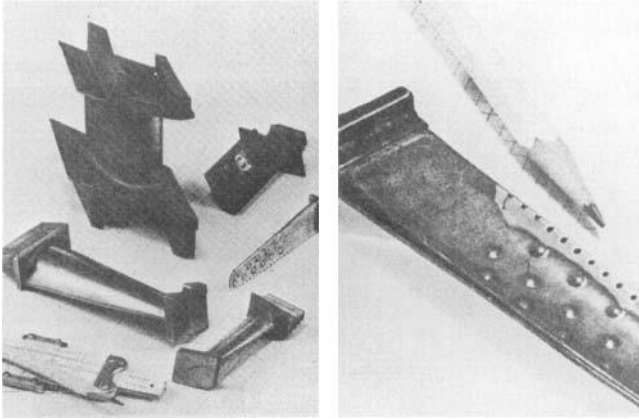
Jet engine blades, vanes, and impingement tubes.
